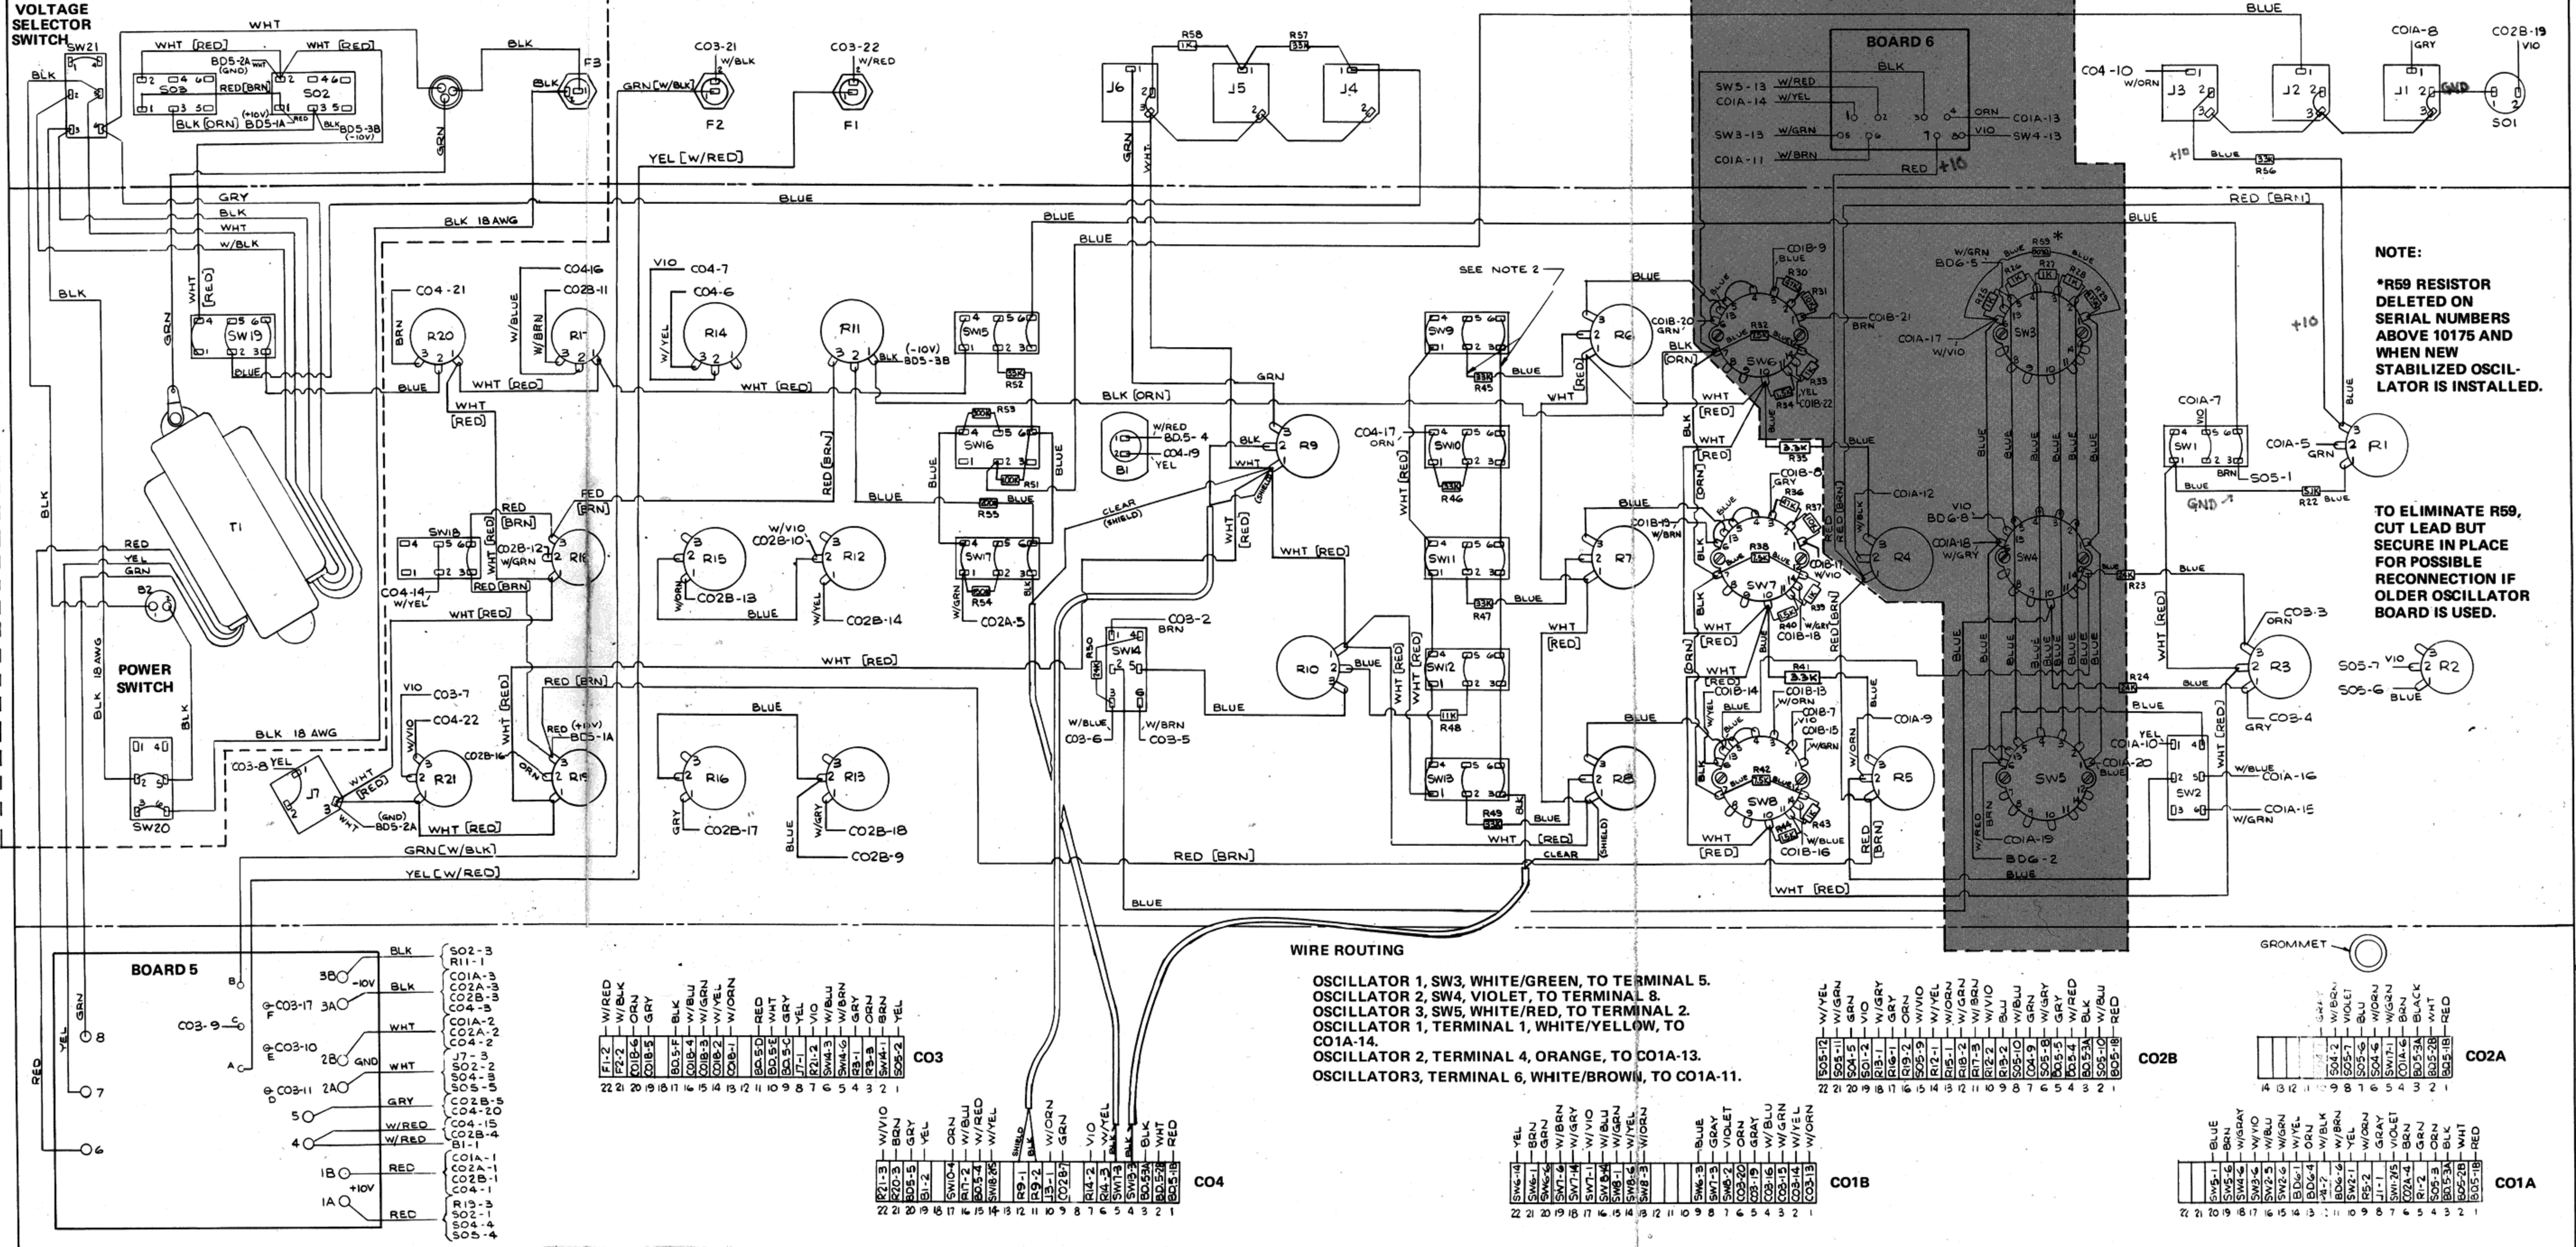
FRONT PANEL ASSEMBLY WIRING DIAGRAM
